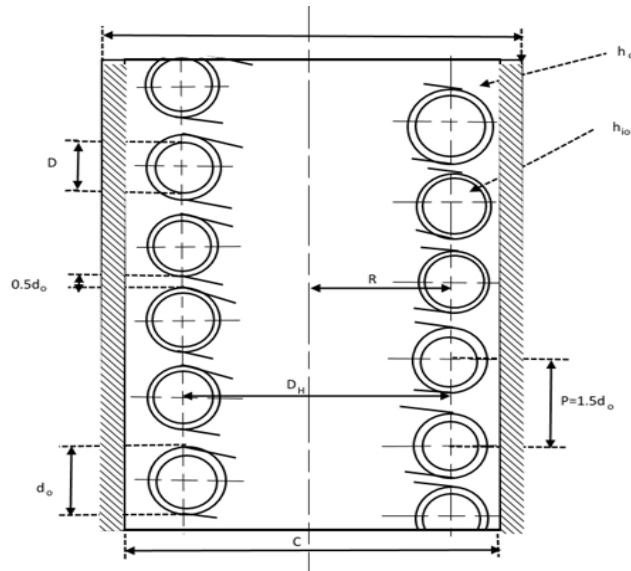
Schematic drawing Helical Coil Tube Heat Exchanger [241].
